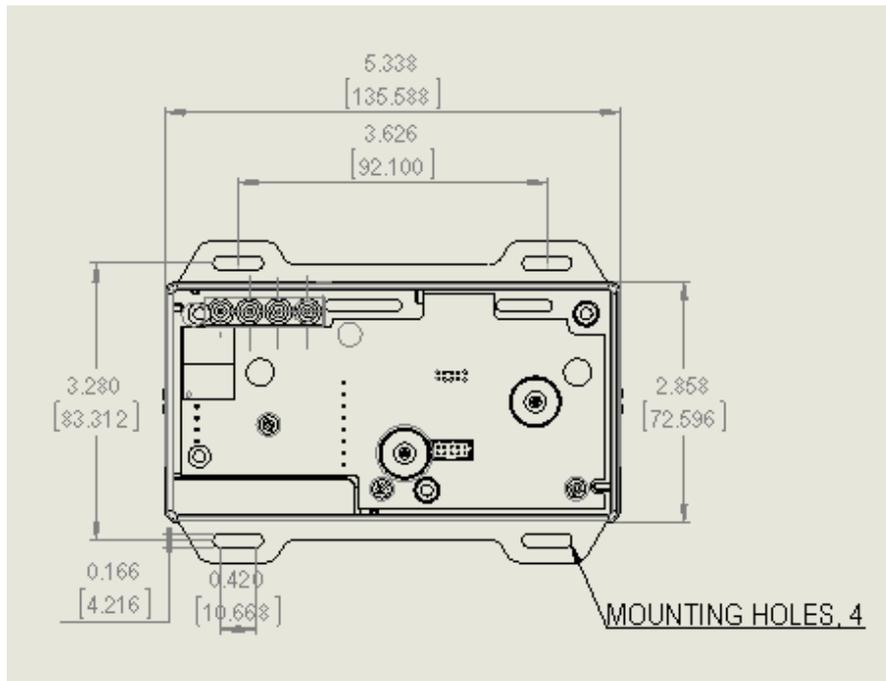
Wall (Flush) mount housing dimensions, front view
